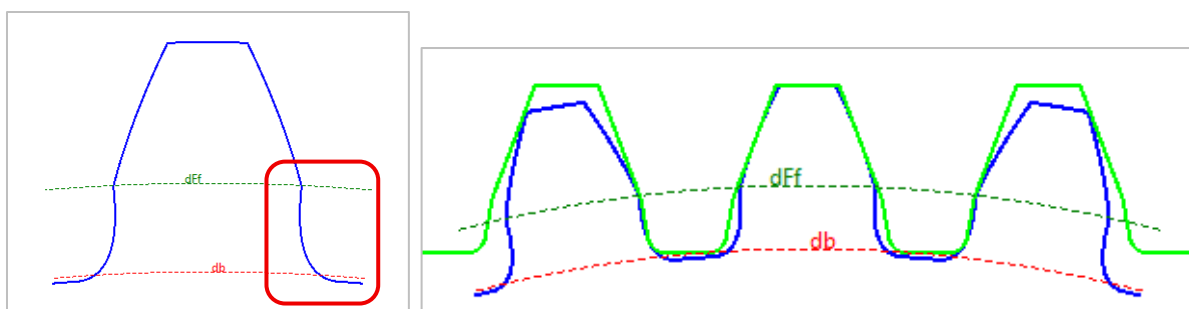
Tooth form with undercut due to the protuberance on the tool.
